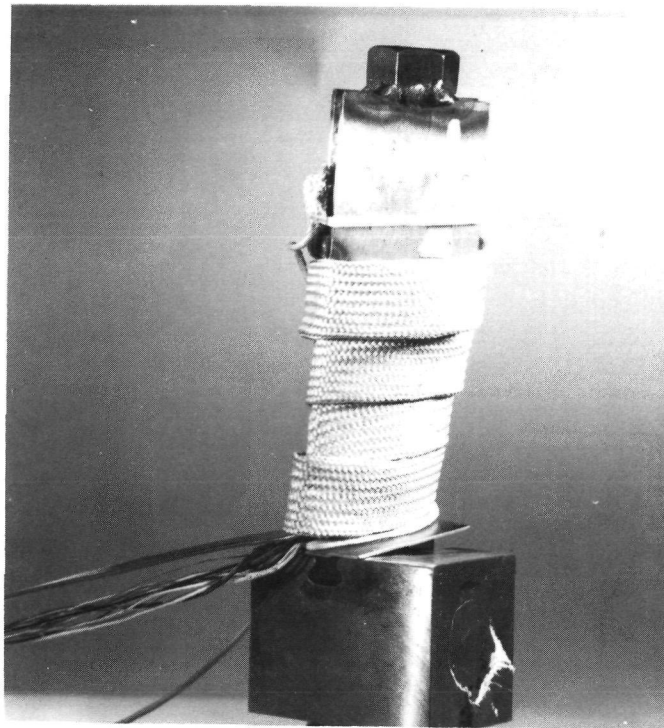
Titanium Test Specimen With Fixtures for Tensile Test, With Heating Tape (77-441-9586-D)
